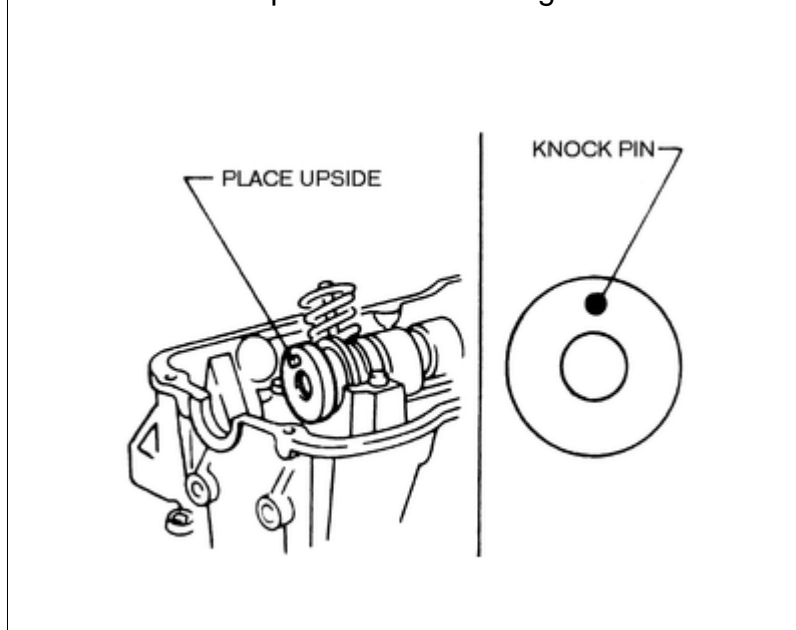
Make sure that the camshaft knockpin is in the UP position — Z24i engine
